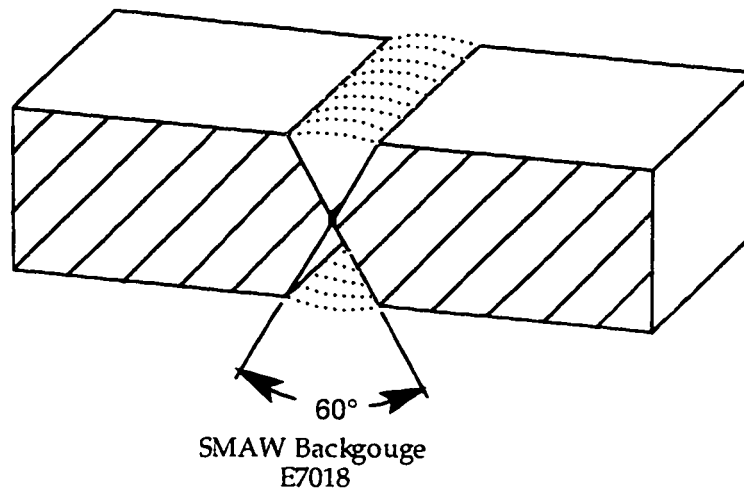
Weld preparation guidelines for weld specimens.
